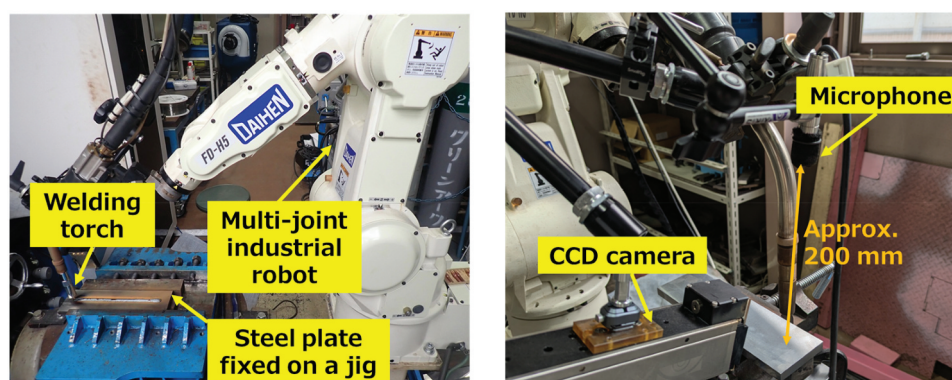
Experimental setup for bead-on-plate welding and acoustic signal acquisition. The steel plate was fixed on a jig, and the welding torch mounted on a multi-joint industrial robot traversed along the plate surface. The microphone and the CCD camera were mounted on fixtures attached to the welding torch and moved together with the torch during welding. The distance between the microphone tip and the plate surface was approximately 200 mm. The CCD camera was installed inside a protective shielding enclosure to prevent damage from arc light, spatter, and fumes during welding.
